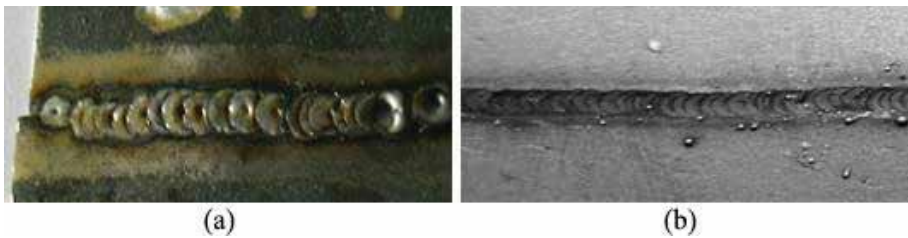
Appearance of micro pulse welding (a) compared to laser welding (b).
